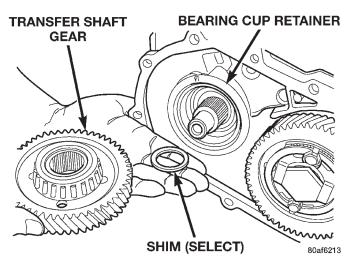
Remove Transfer Shaft Gear and (Select) Shim
